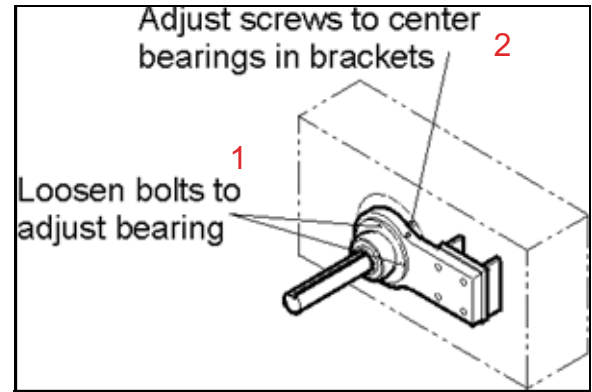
POSITIONING THE SPHERICAL BEARINGS
